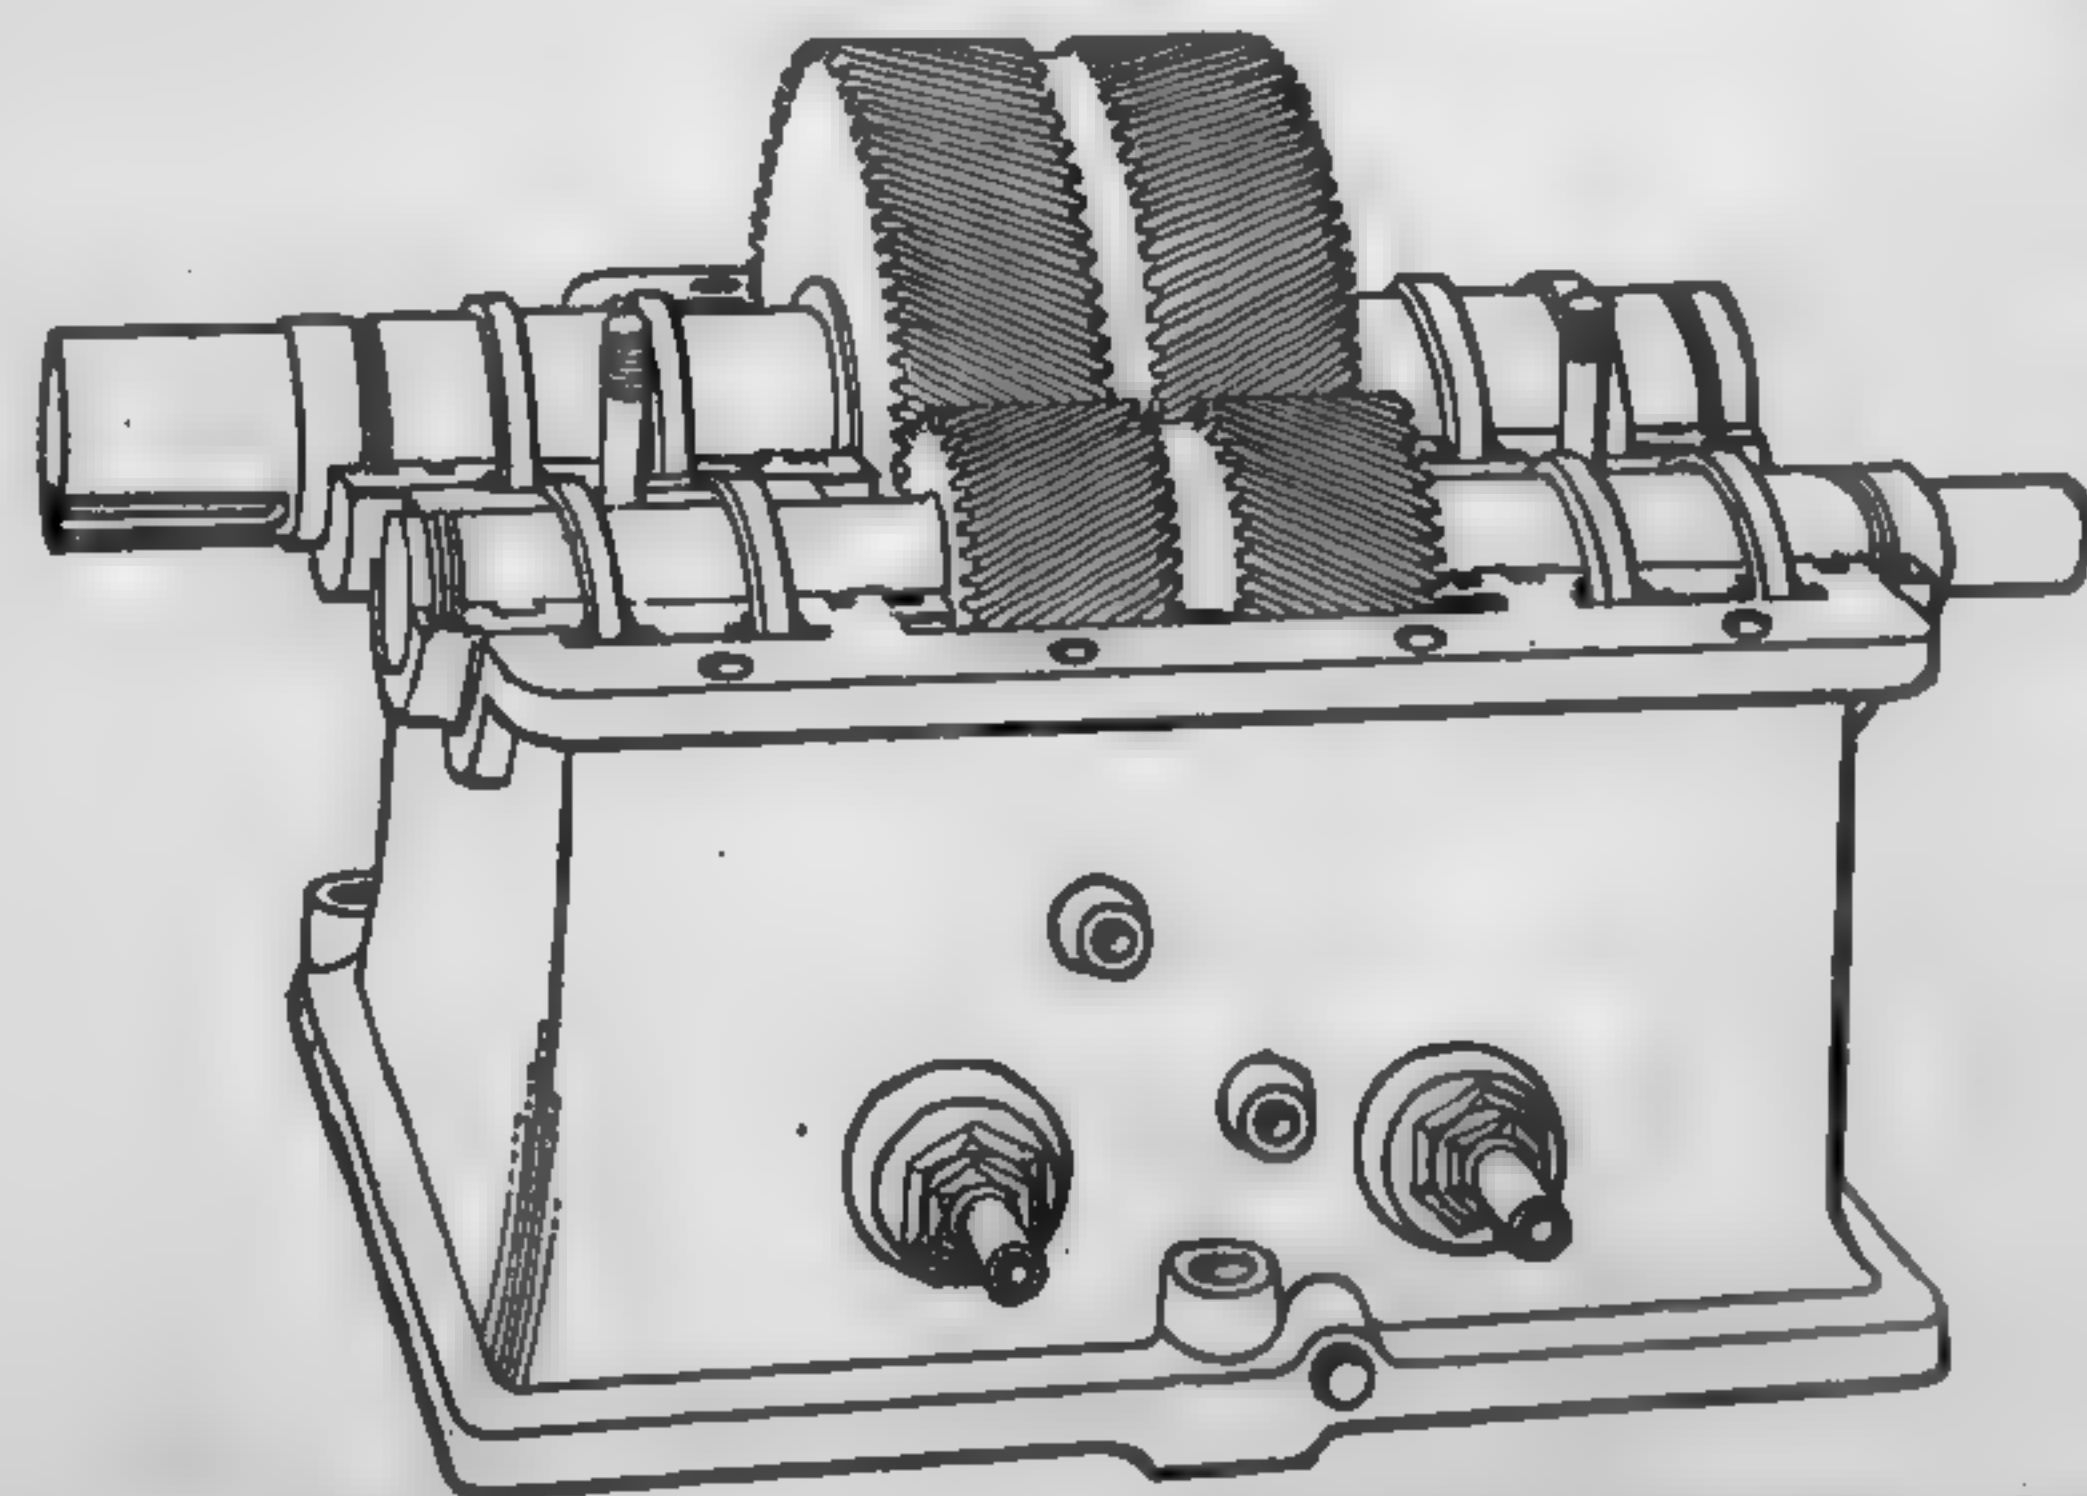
Westinghouse Reduction Gearing for Small Units.
